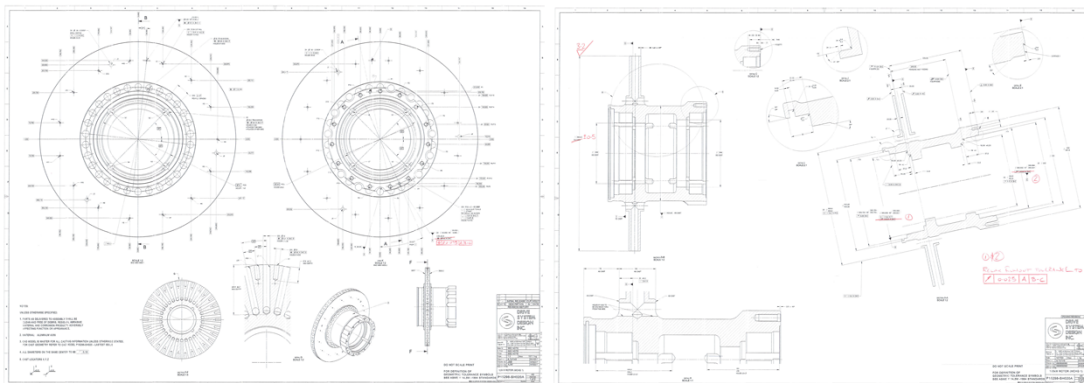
Machine drawing of the rotor, part SH020, which is part of the magnetic assembly of the gearbox.
